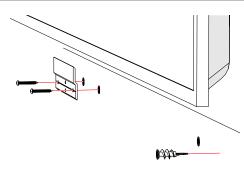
A. Screw drywall anchors into drywall at Z-CLIP outer hole locations.
